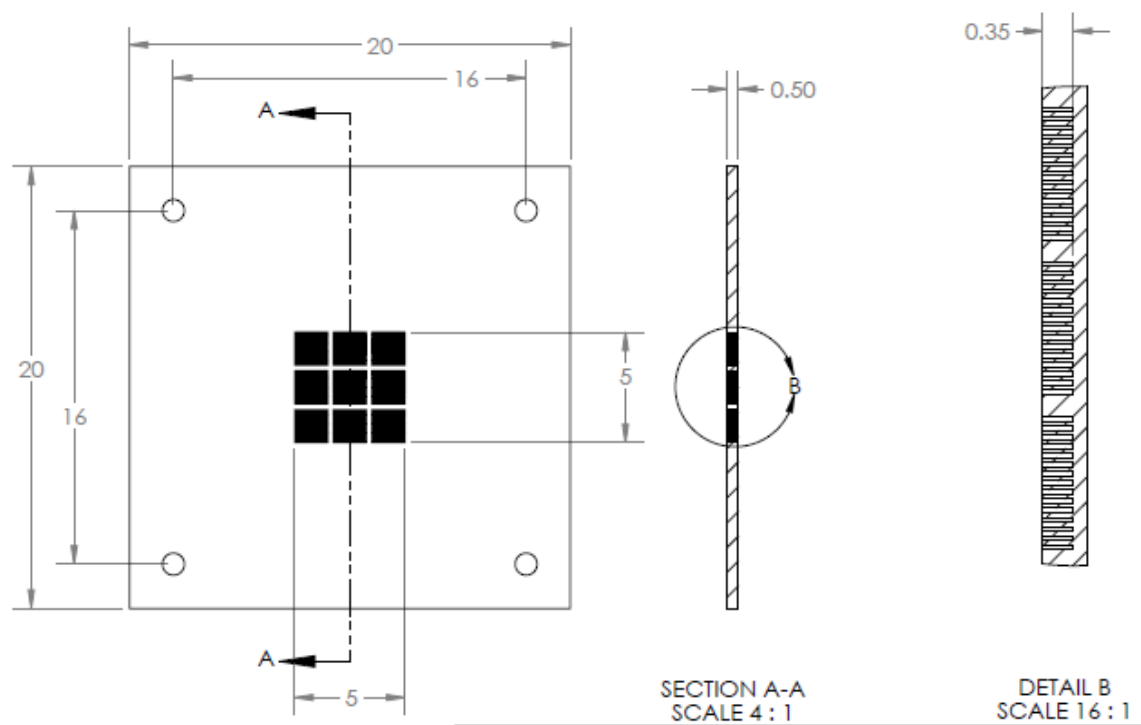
Technical drawing for a  $3 \times 3$  microchannel plate. Note that the channel dimensions change depending on the sample.
